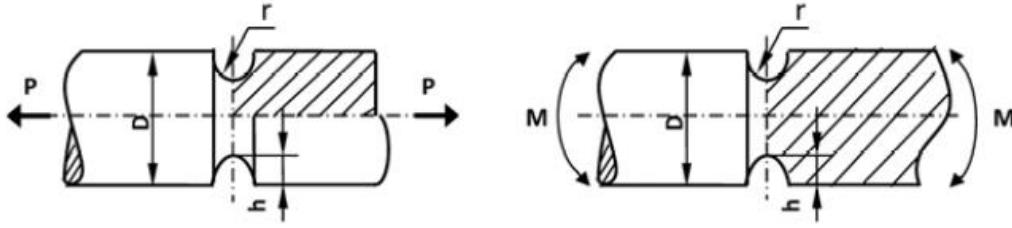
Bar of circular cross section with u-shaped groove subjected to tension and bending [9]
